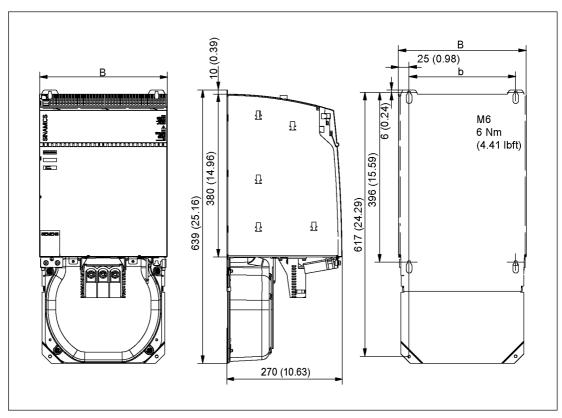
Dimension drawing of motor module with internal air cooling (132 A and 200 A)
